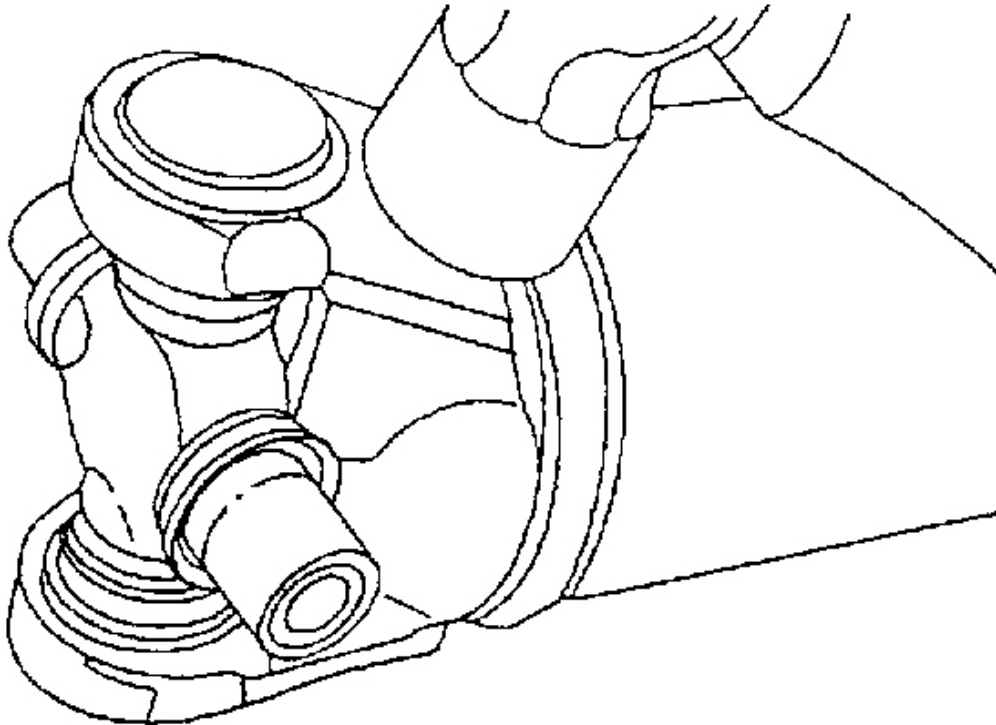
Seating Retainer Using Hammer (External Snap Ring)
